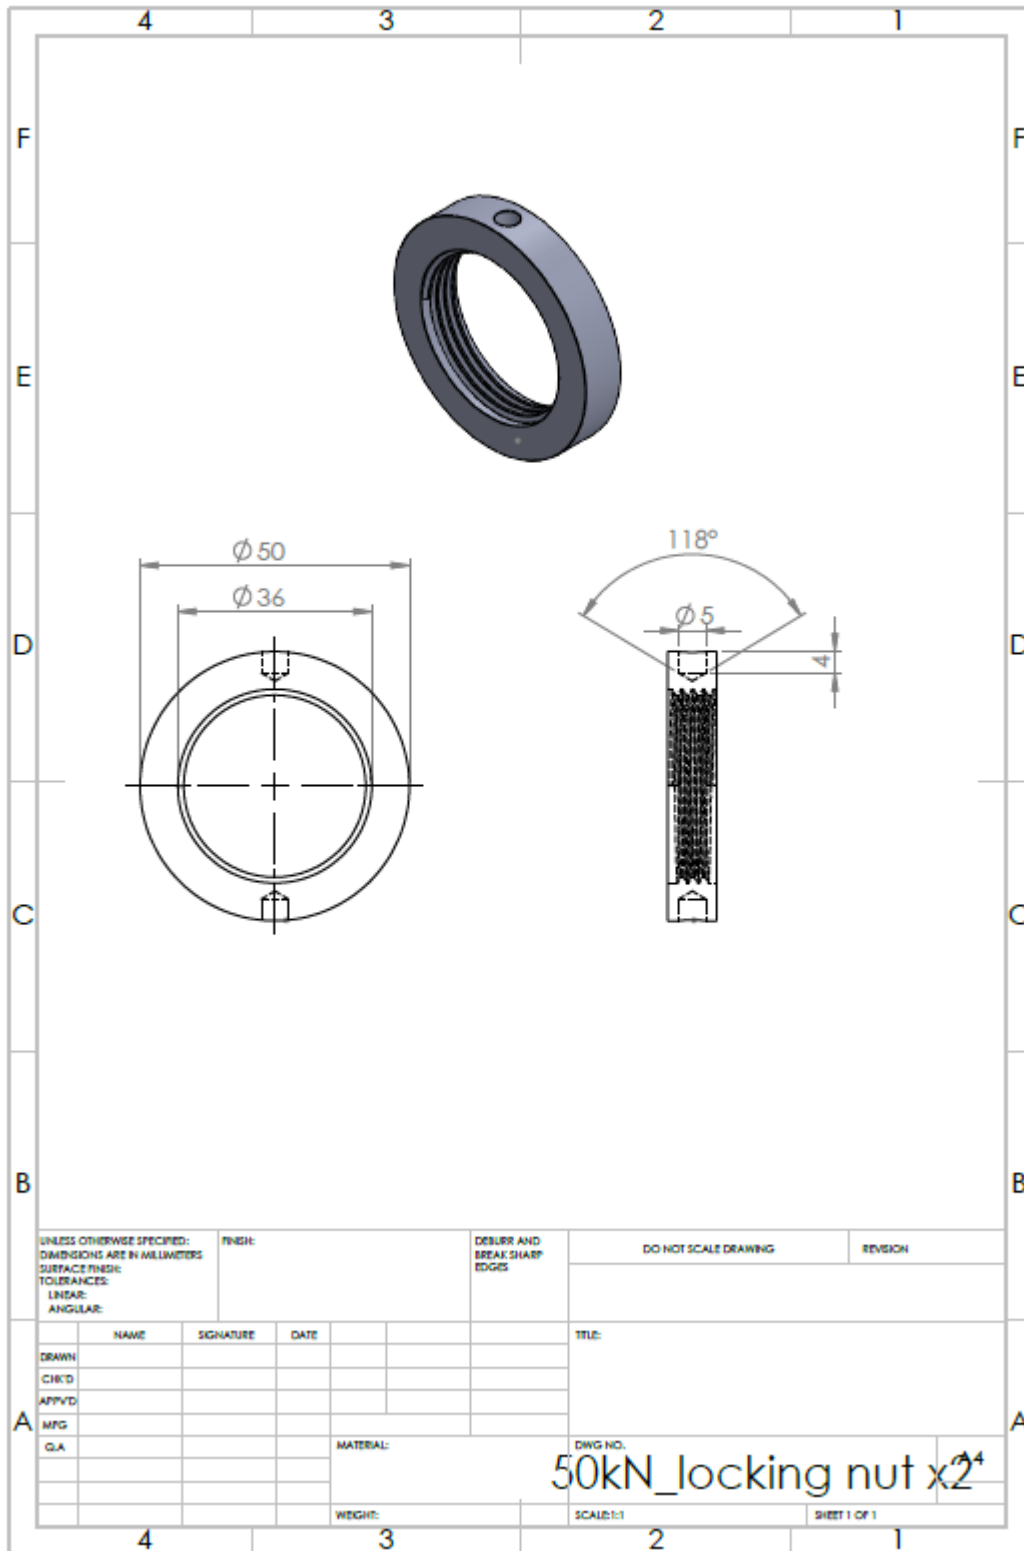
Technical drawing of the locking nut for the 50 kN platens
